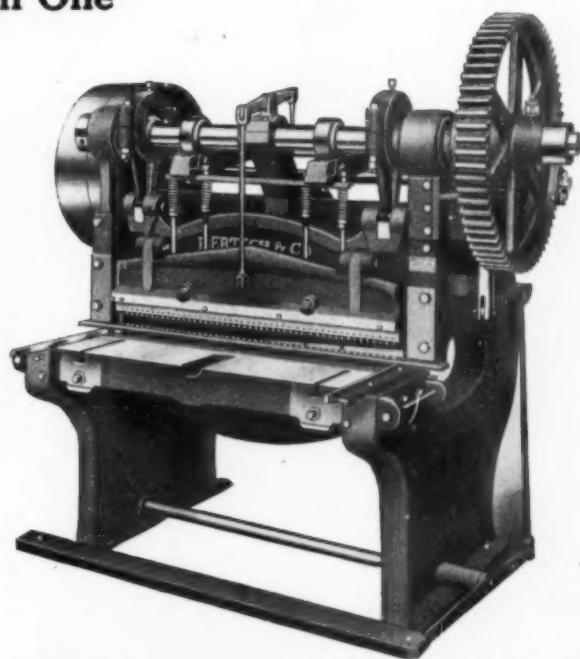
shows the punch-cross-head locked in position for punching and shearing in one operation.
